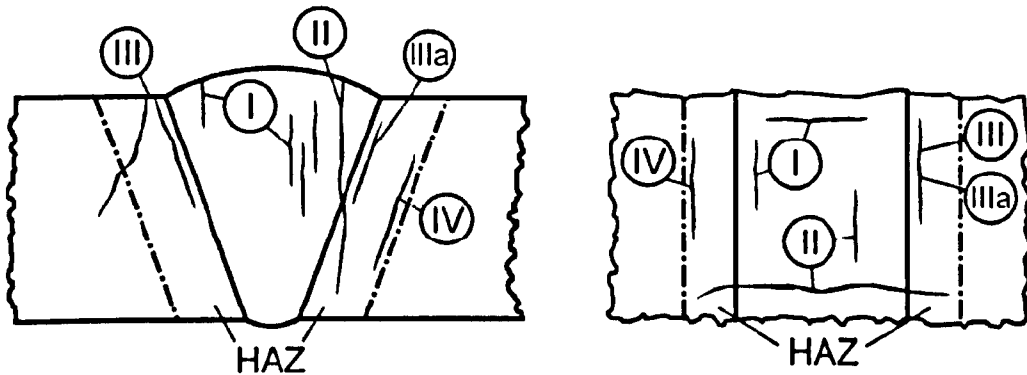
Schematic of cracking modes in weldments in heat resistant steels [75], [84].
